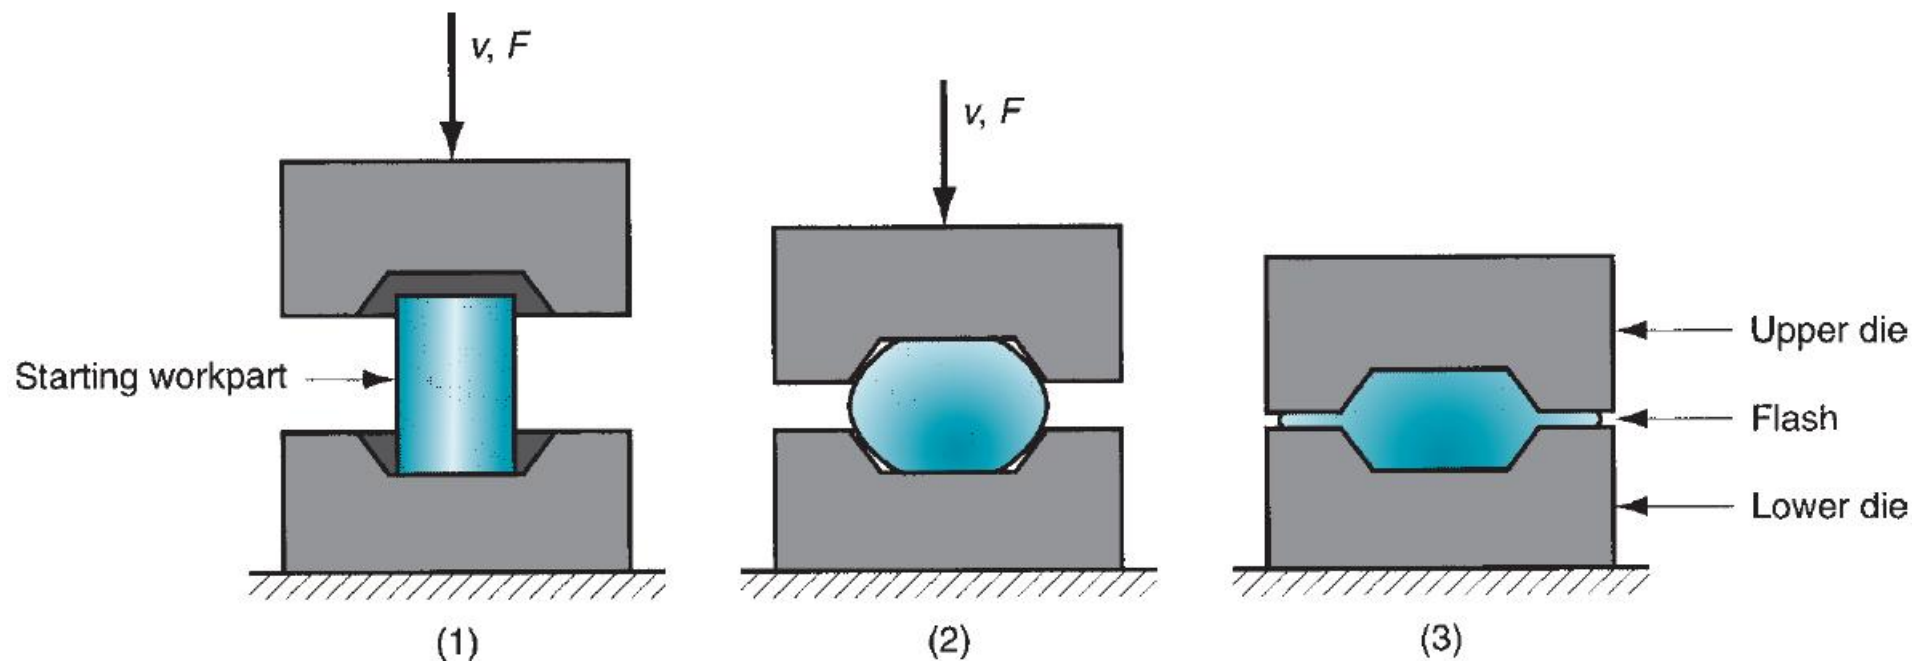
Sequence in impression-die forging: (1) just prior to initial contact with raw workpiece, (2) partial compression, and (3) final die closure, causing flash to form in gap between die plates.
